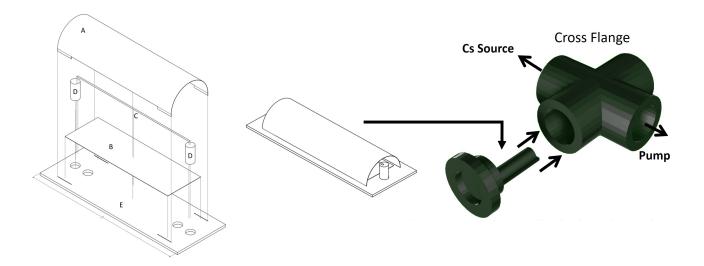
On the left, the exploded assembly of the gauge, on the middle, the assembled gauge, and on the right the positioning of the gauge in the manifold. There are copper wires that were not depicted connecting the cylindrical (A) and flat (B) copper plates, as well as the filament ends, to independent pins in a feedthrough. The filament (C) is connected to screws which act as leads (D). All elements are isolated from each other through ceramic beads and boards like the base ceramic support (E). The copper wires are thick enough to support the structure without it dipping and touching the manifold.
